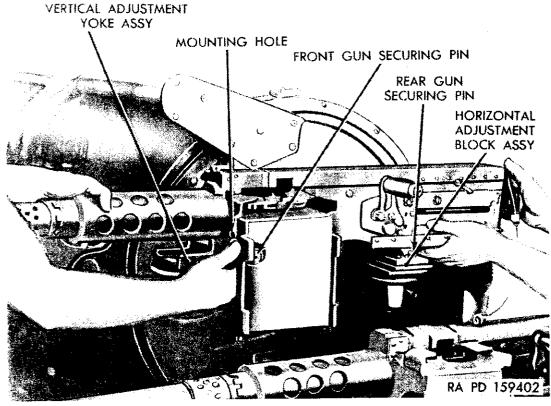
Cal. 50 Browning machine gun M2 mounted on mount M45.
